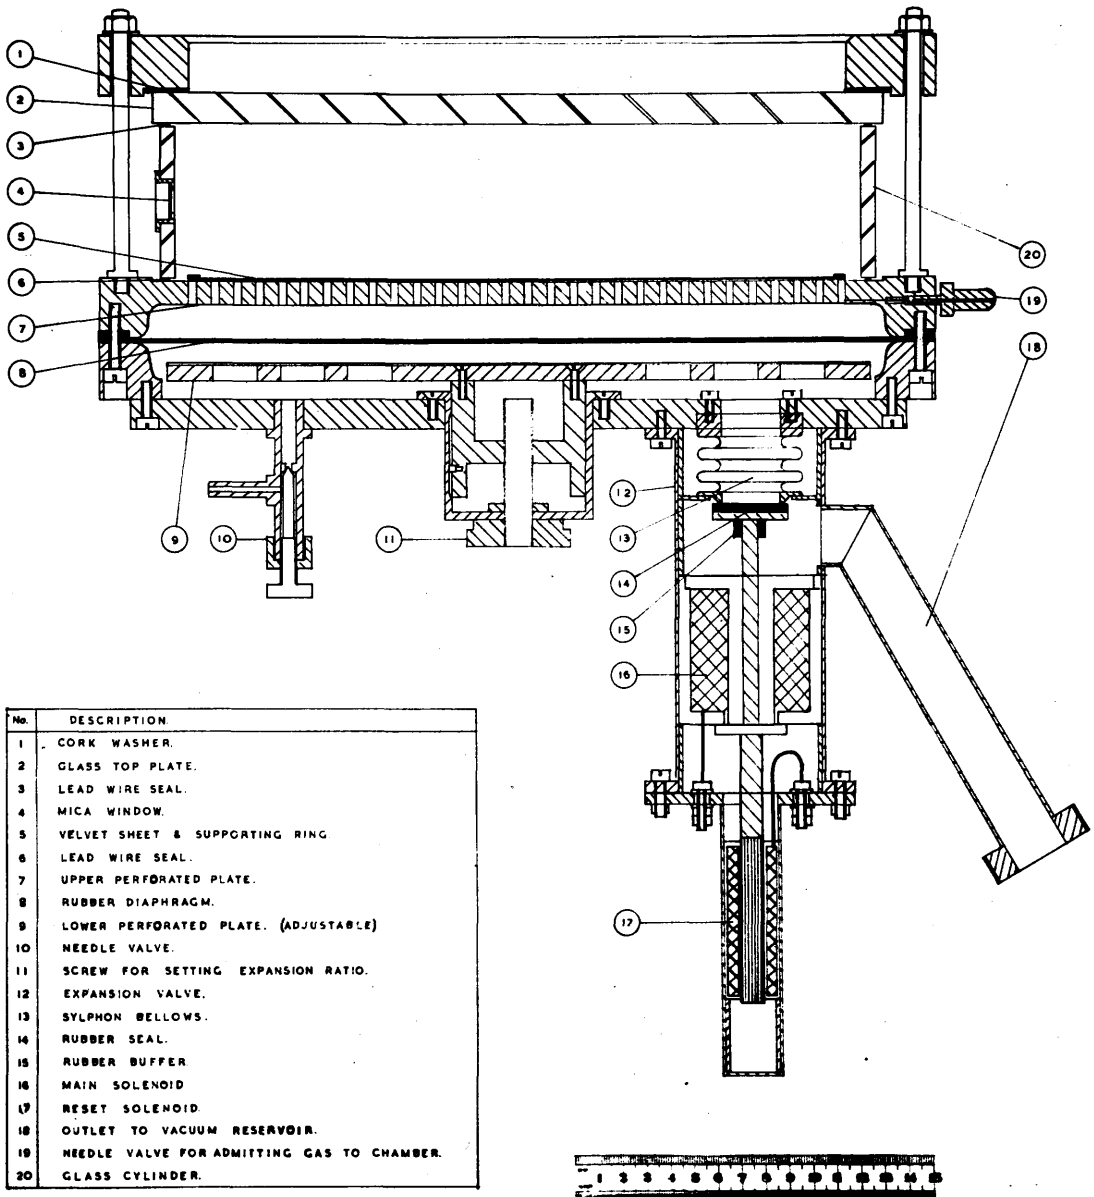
A section of the twelve-inch expansion chamber used in the investigation.
